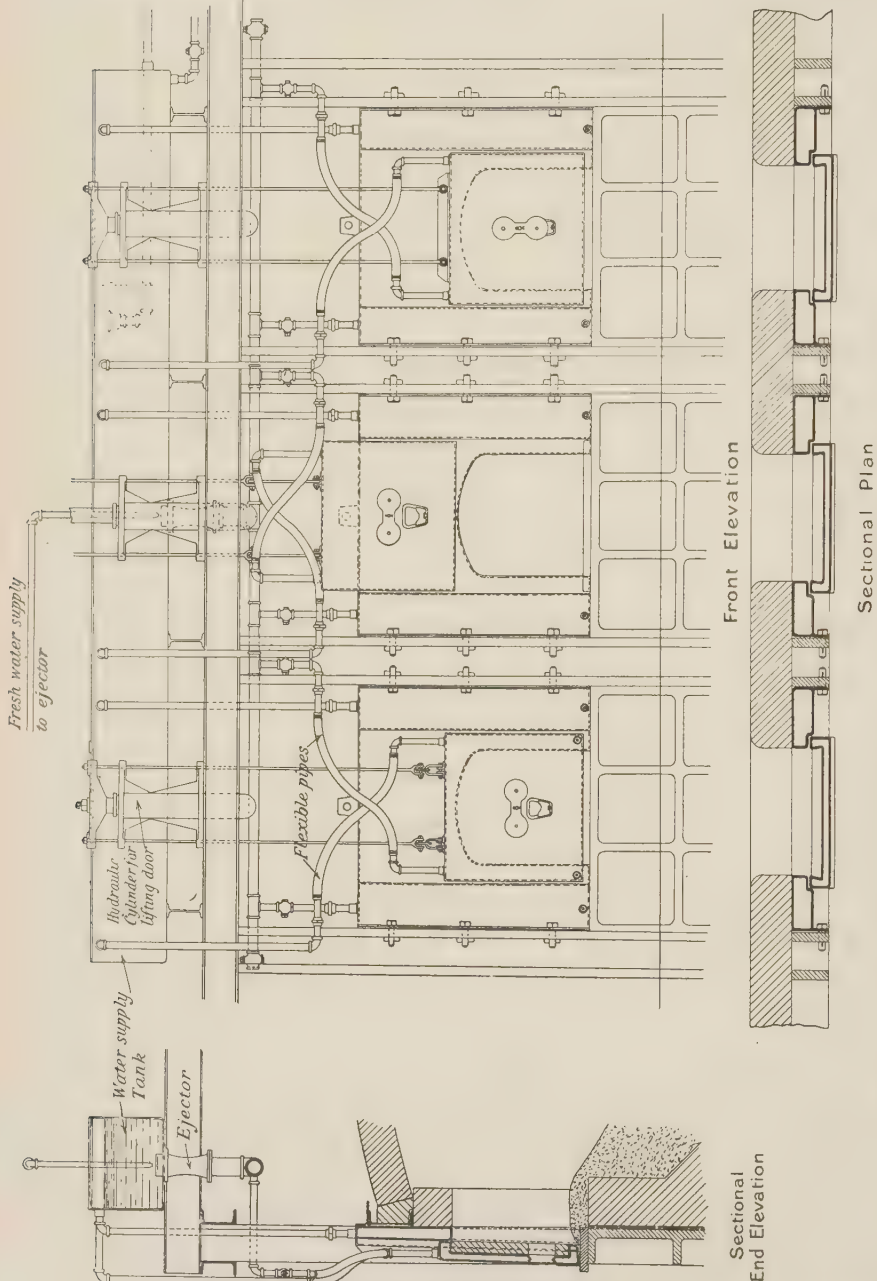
Arrangement of Knox Patent Water-cooled Doors and Frames on Open-hearth Furnace.
